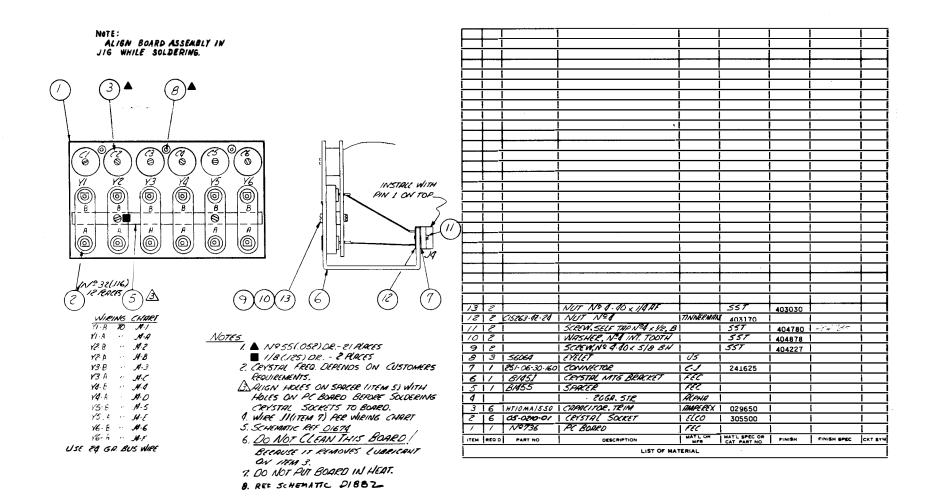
Crystal Holder Assembly N0736-J4-C1900F
